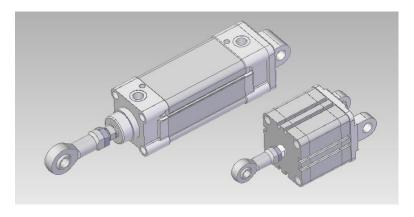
Left cylinder, XL-063-80 with rod eye and swivel base. Right cylinder, NXD-063-30 with rod eye and double mounting ears.
